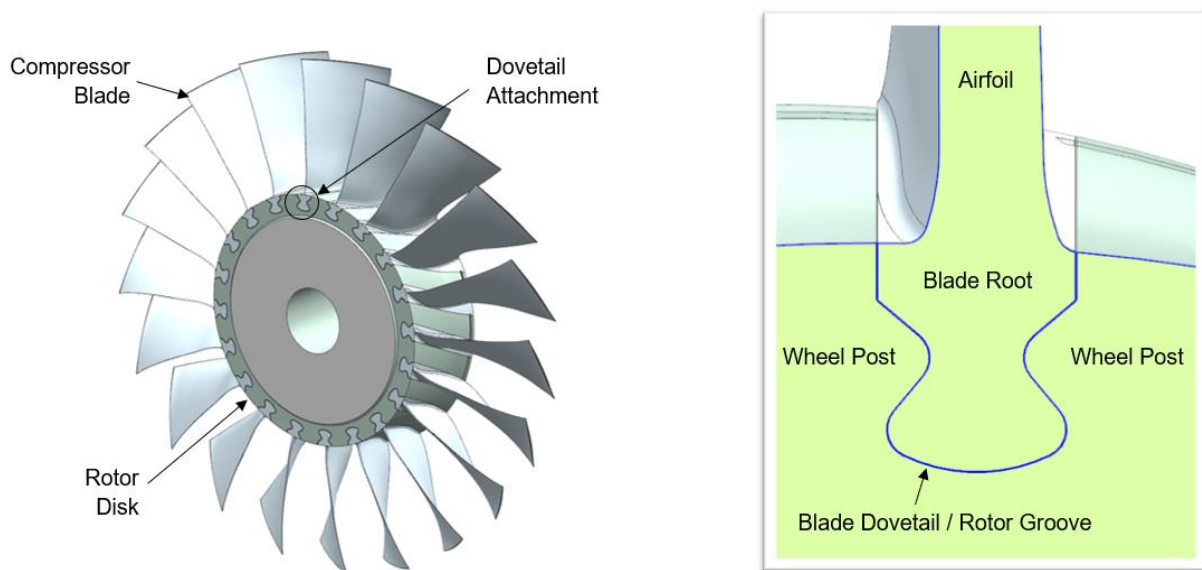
Compressor Bladed Rotor Disk with Dovetail Attachment
